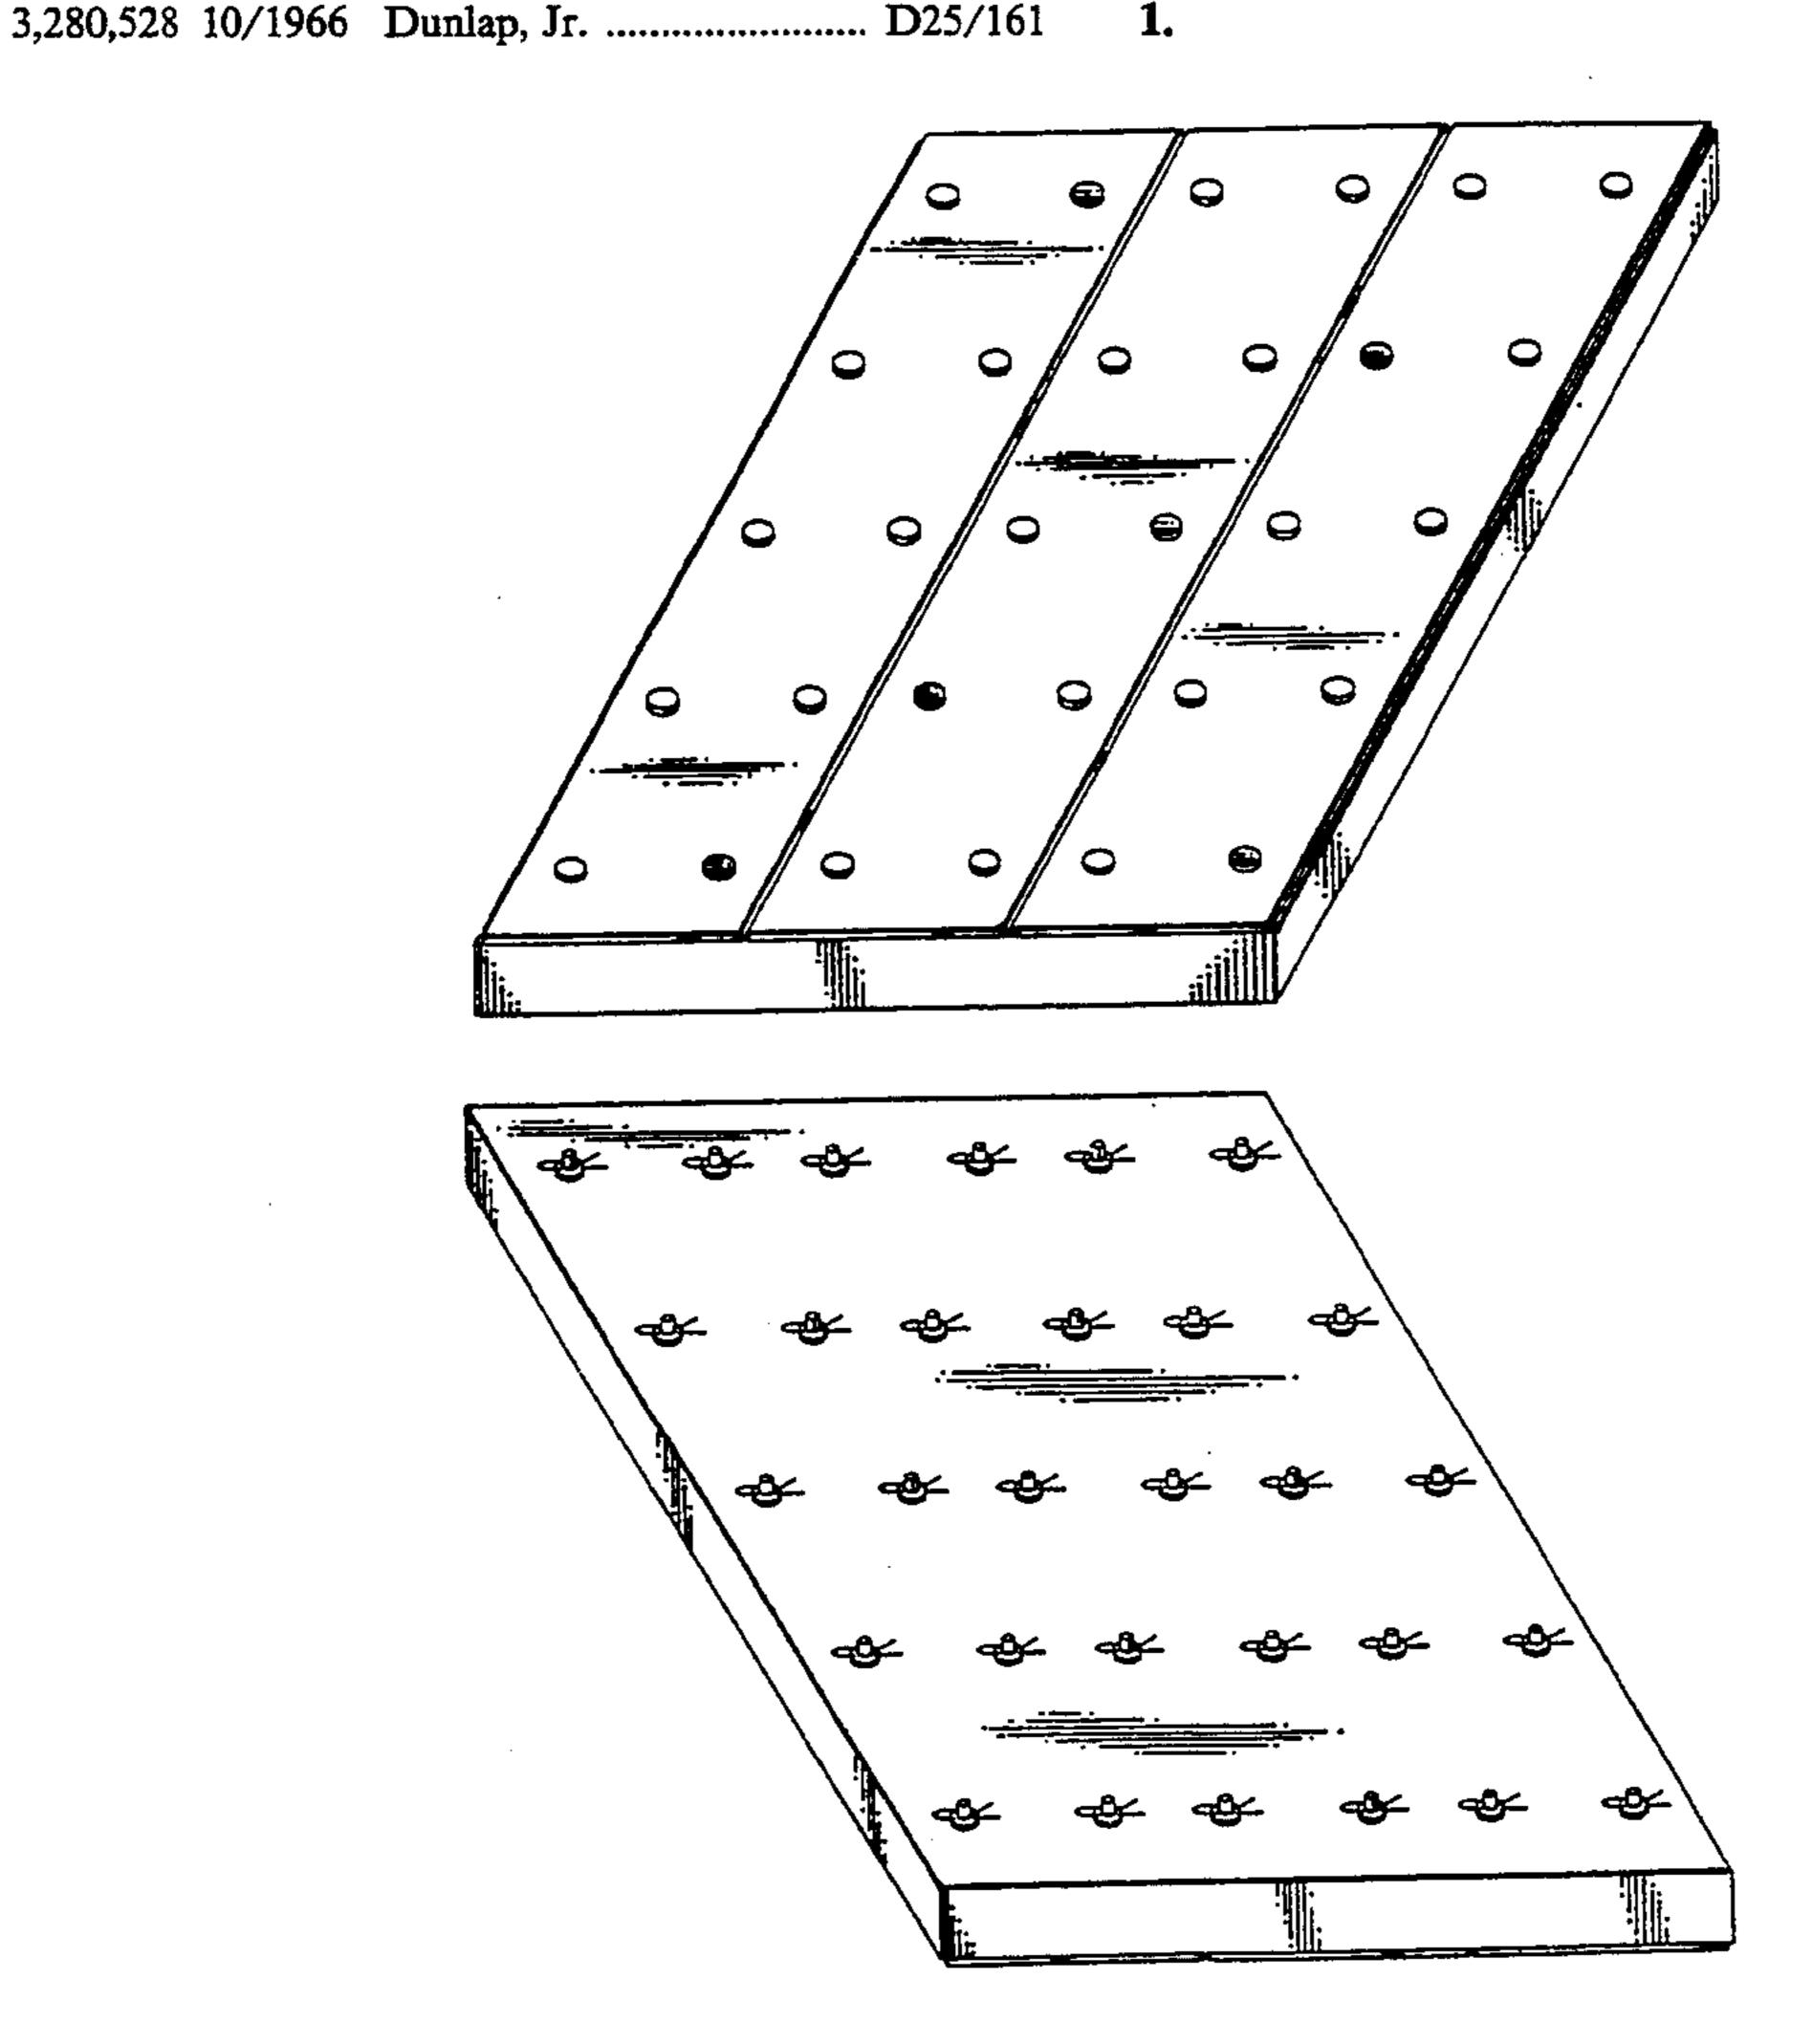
is a perspective view from one end and above of a reflector used in paper making machinery to receive, store and re-emit infrared radiation.
